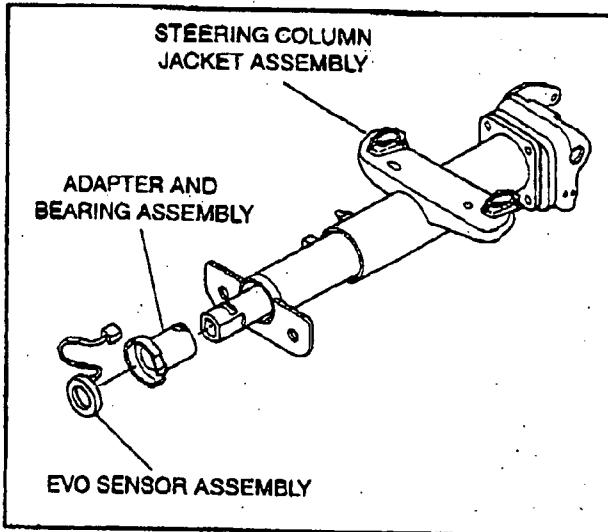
Removing Bearing Assembly and Sensor from Steering Column
